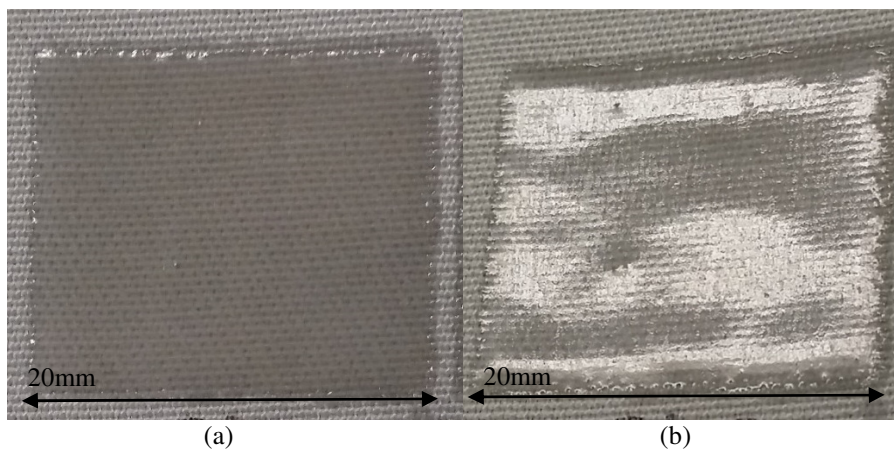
Optimized single layered print (a) top view (b) angled view
